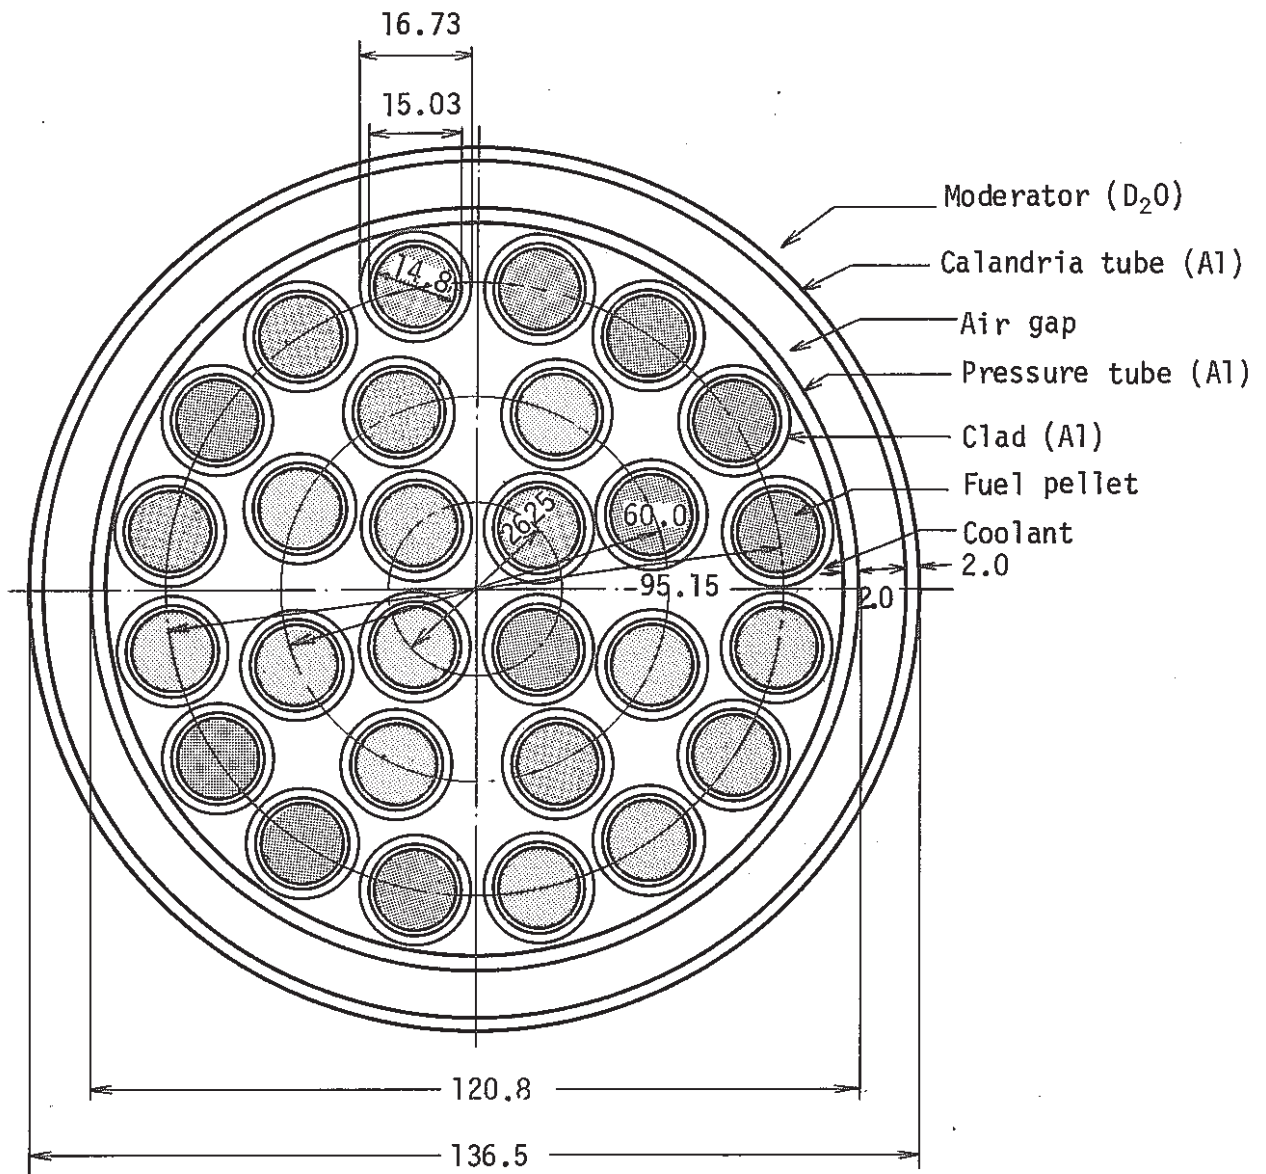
Cross-sectional view of 28-rod fuel assembly
